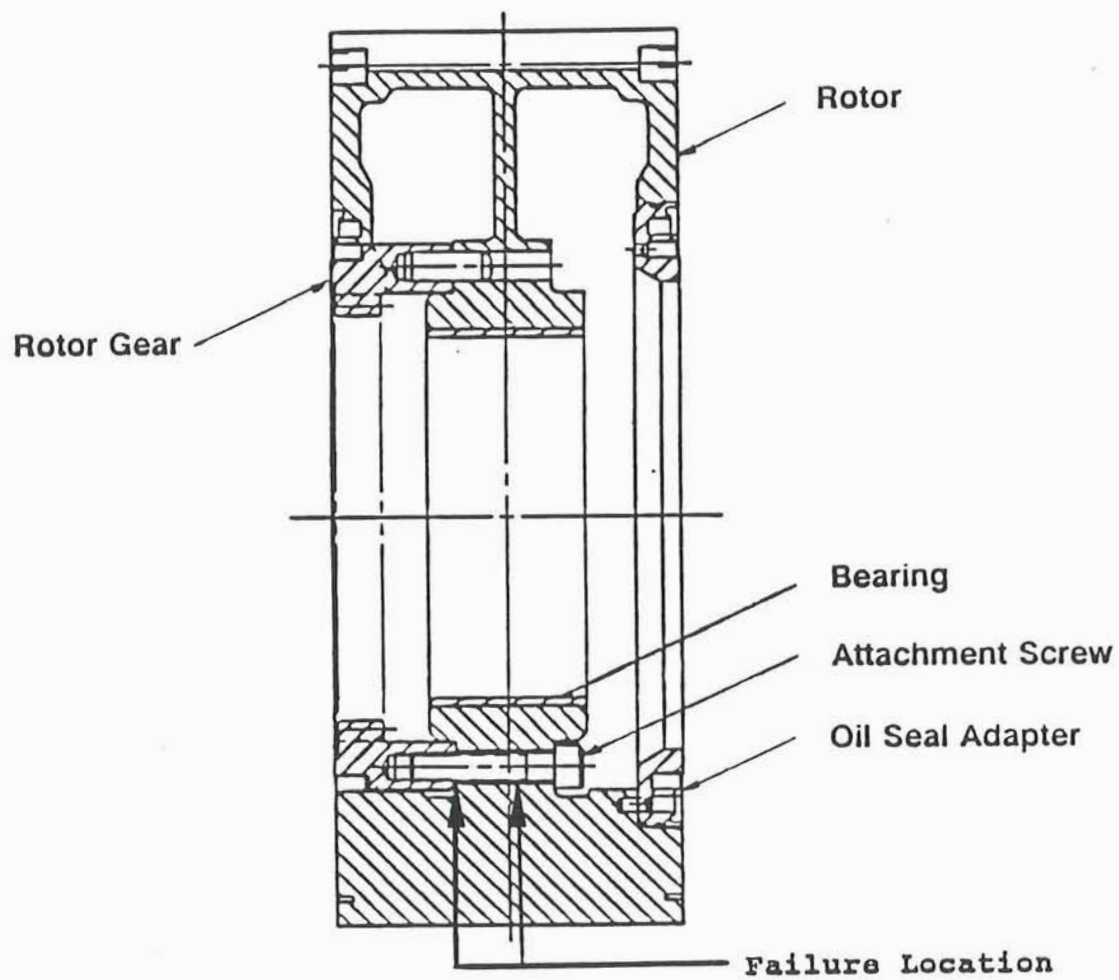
Failure of Rotor Gear Attachment Screw
